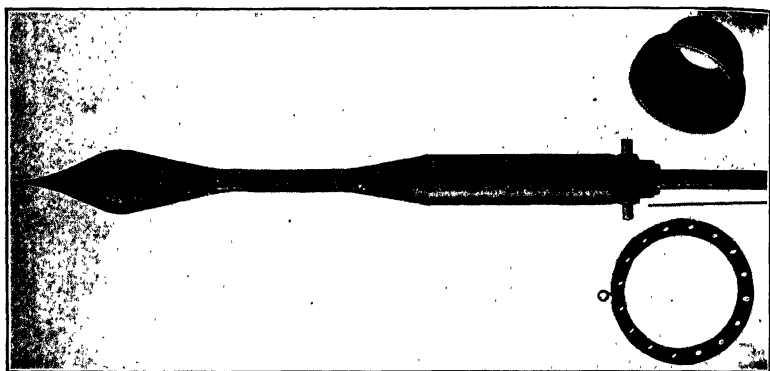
Pelton needle and nozzle tip. (*Courtesy of Pelton Water Wheel Co.*)
